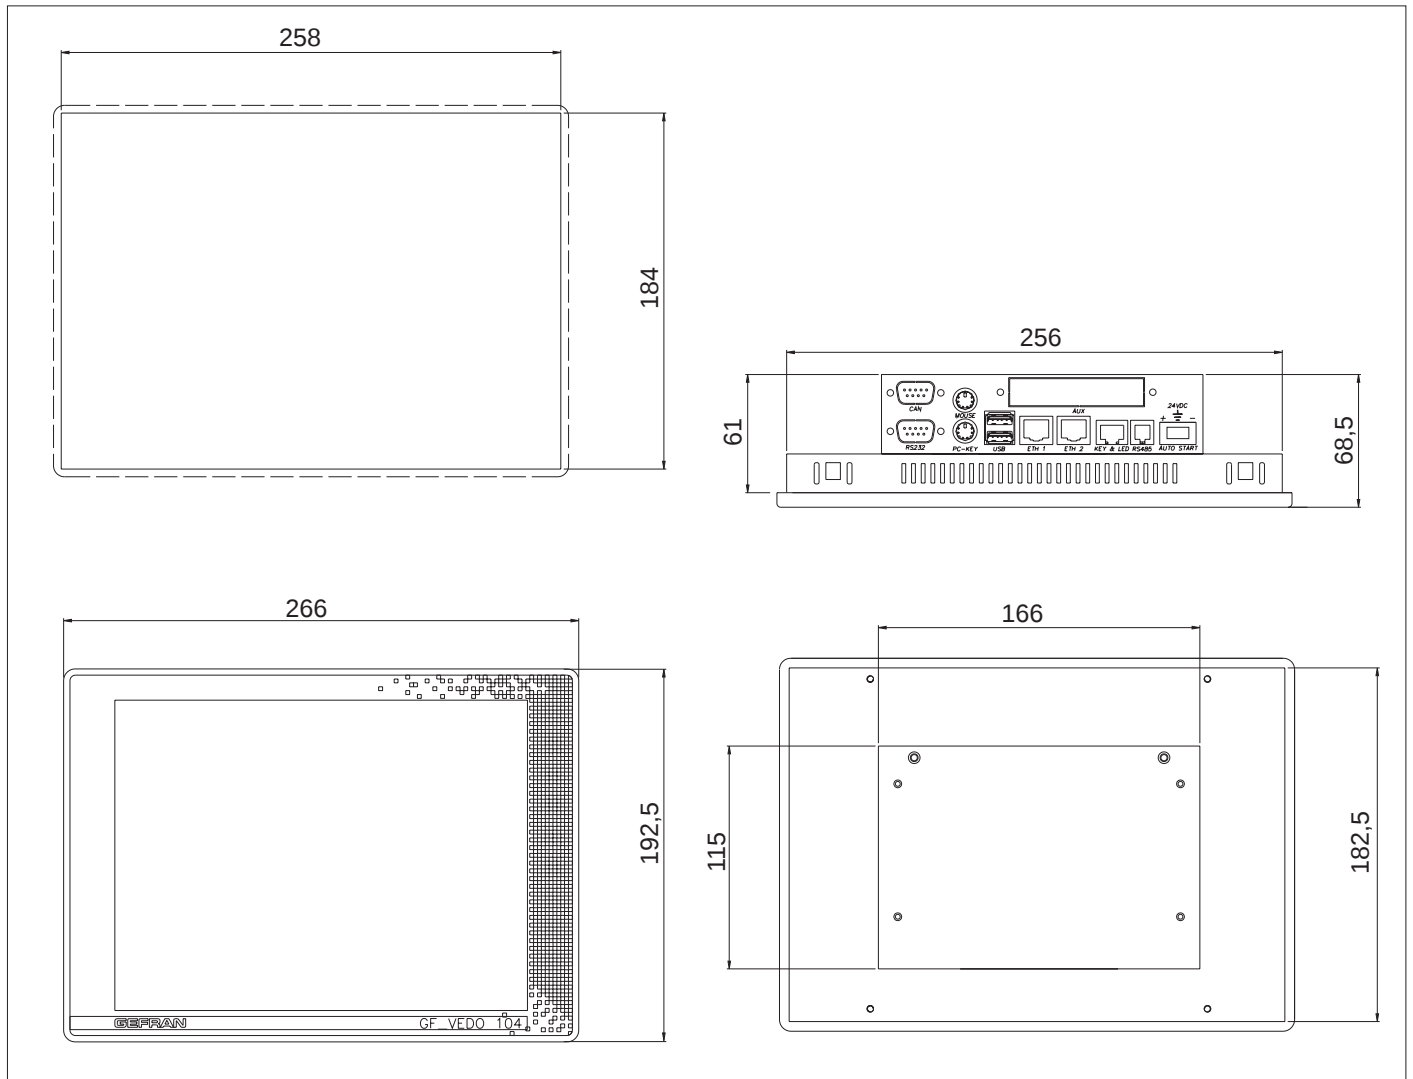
Dimensions and cut-out GF_VEDO 104CT
